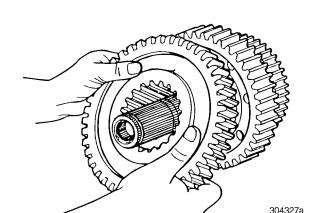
Removing Reverse Gear Mainshaft Snap Ring
